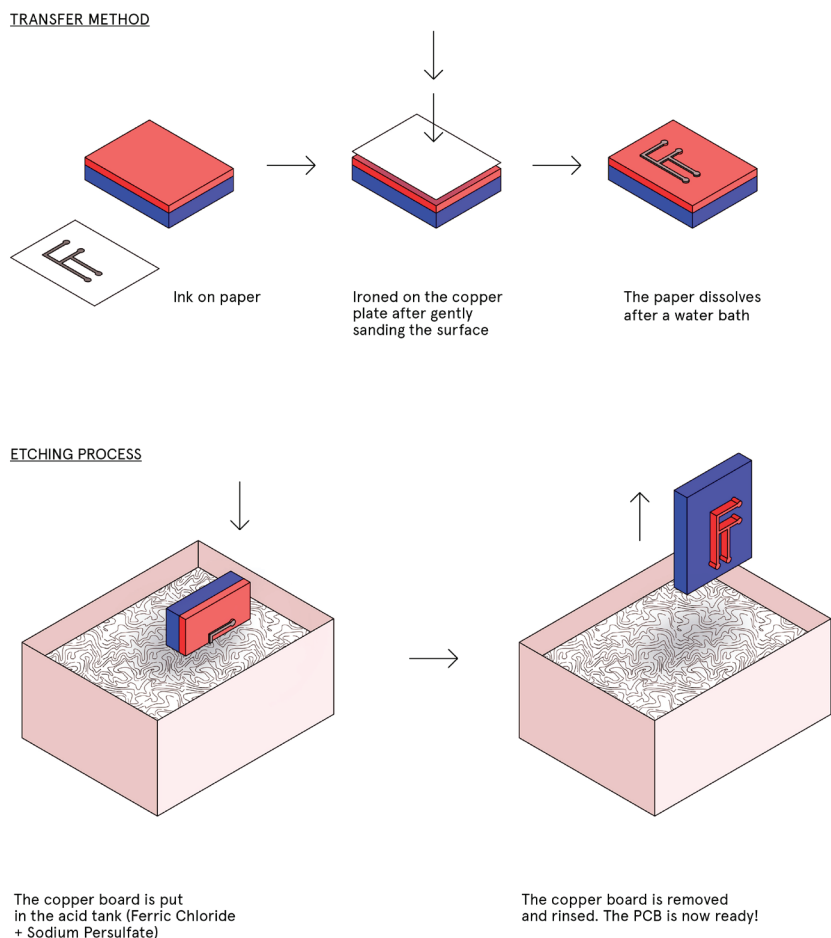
The subtractive method of etching a printed circuit board (our drawings)
